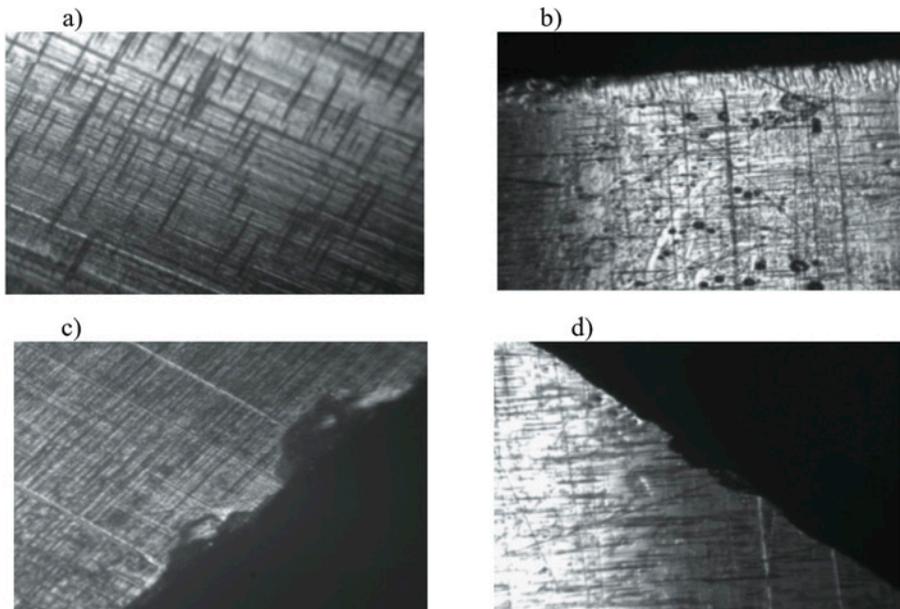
Image of an injection section piston surface: a) a new piston surface fragment (the grinding traces clearly dominate), b, c, d) the piston surface area after operation (125x zoom) [16]
